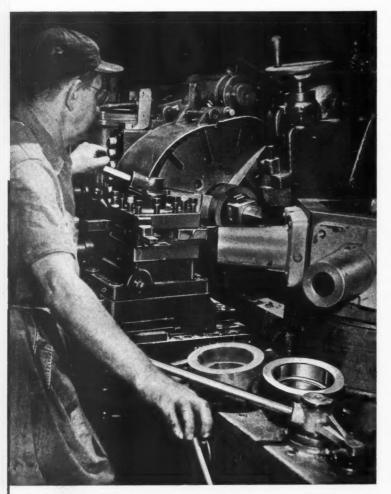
Both the large- and smalldiameter ends of the chamber are internally milled and threaded on the thread milling machine here shown
